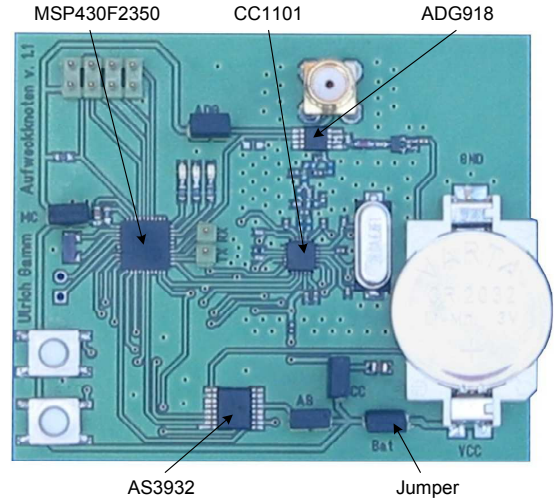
Assembled node using SMD components and a two layer PCB-board.
